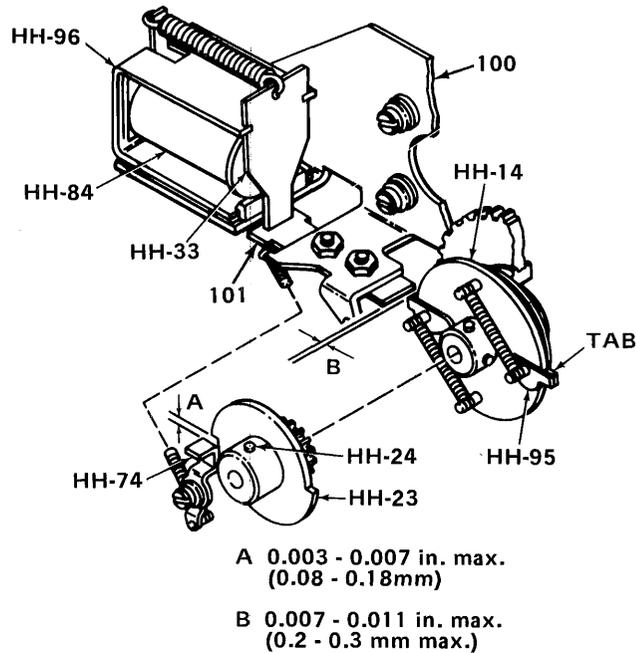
TWO ADJUSTMENTS, GEAR WITH STOP CAM (HH-23) AND INSIDE CAM (HH-14)
